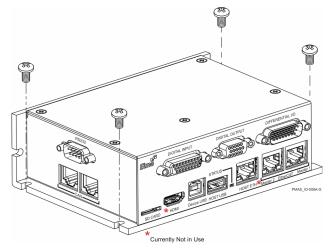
Surface Mounting the Platinum Maestro with Integrated IO
